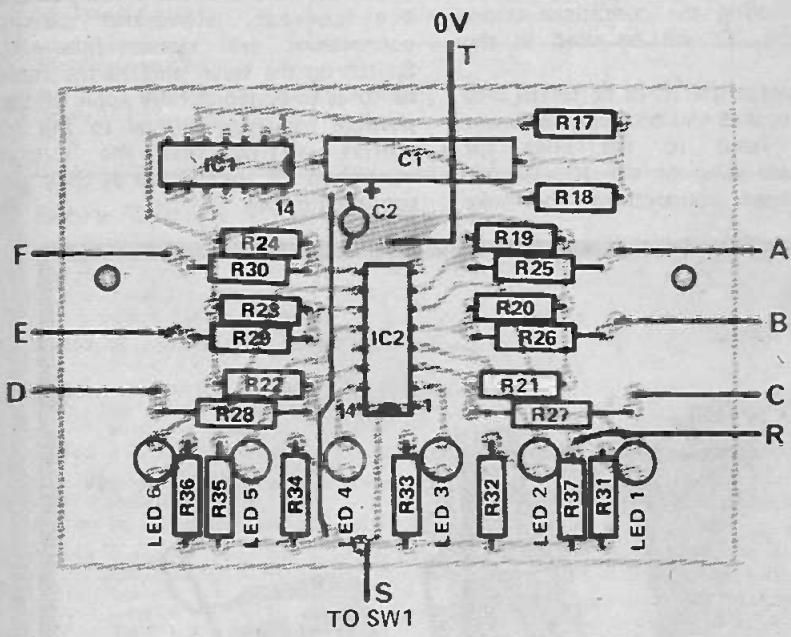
Component overlay for board ETI-123a. Note that C1 may need to be mounted on reverse side, and that the LEDs should be mounted as detailed in the text.
